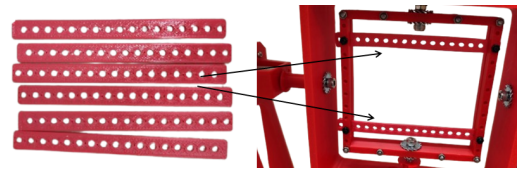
Universal mounting fixture made out of TPU (left) attached to the inner frame (right).
